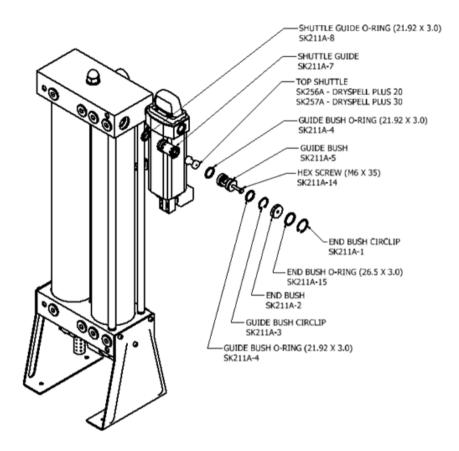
Exploded view to illustrate servicing of top shuttle in Dryspell Plus models 20 and 30
